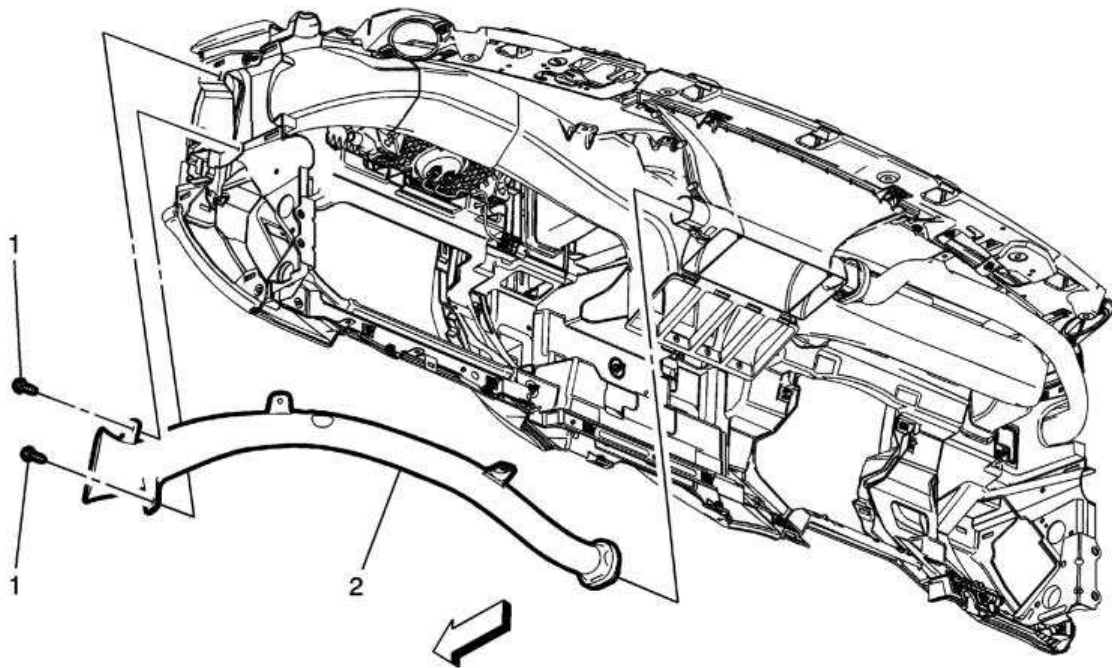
Side Window Defogger Outlet Duct - Right Side
